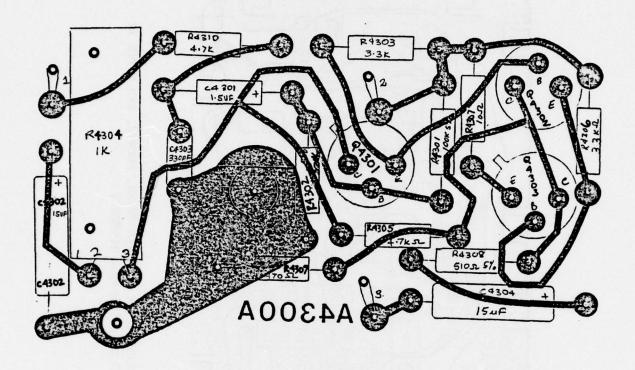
P.C. BOARD LAYOUT FOR THE A4300A AUDIO AND SQUELCH PREAMPLIFIER ASSEMBLY
